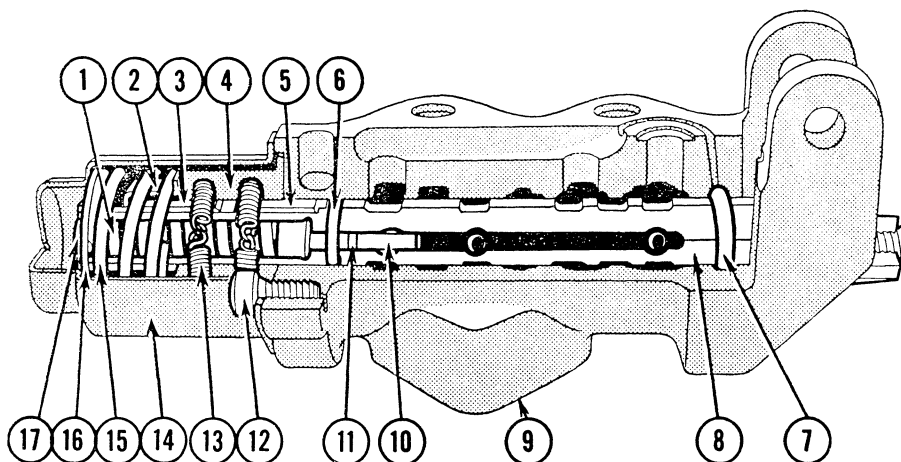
Cut-away view of the Pony hydraulic lift control valve.
